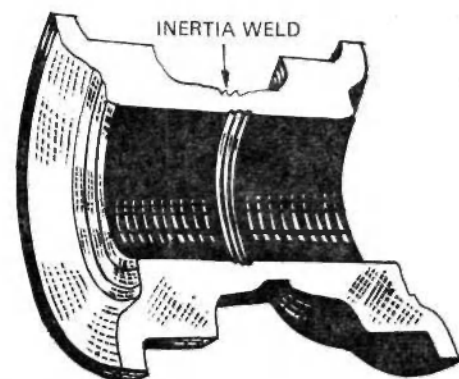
Track roller halves welded by inertia welding. Here submerged arc welding was being done after bevelling the mating edges and machining a pigot for correct centering. The material involved is SAE 103B or 1046. The diameter at the weld is 150 to 200 mm
